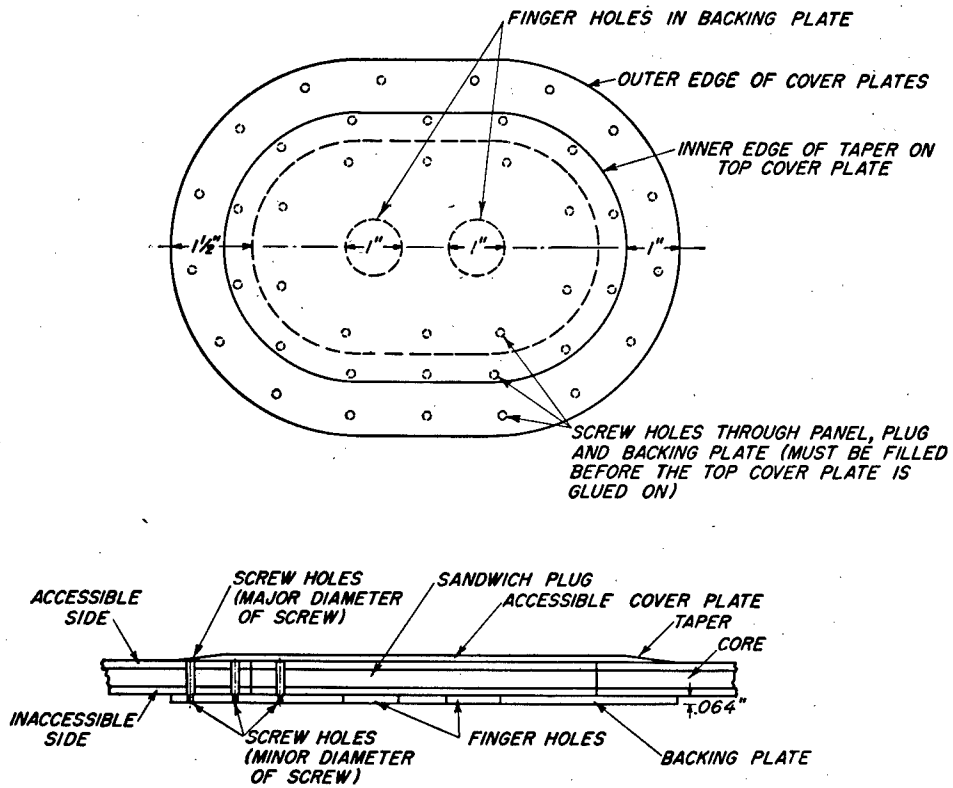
Oval patch assembly used in aluminum-faced parts when one side only is accessible.
